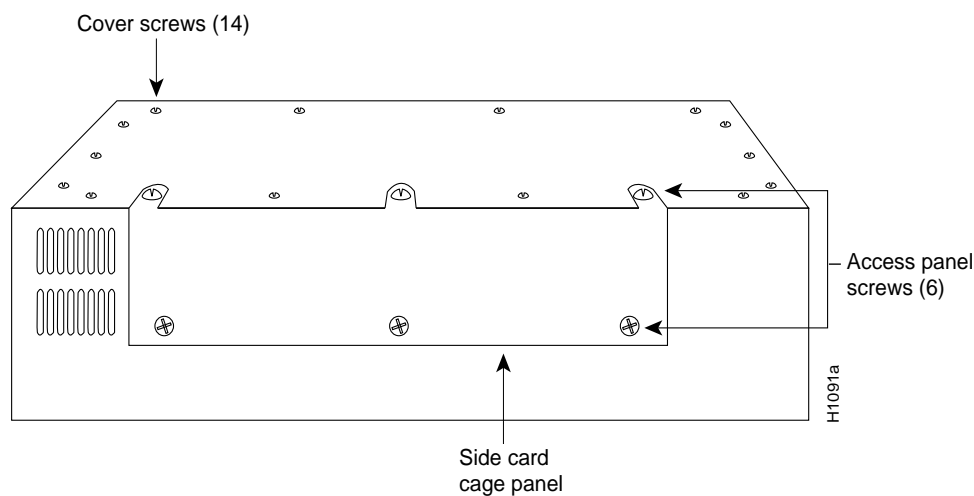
Screw Locations on the MGS Chassis Exterior—Side View
